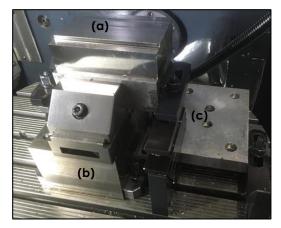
Experimental setup; (a) Workpiece – Inconel 718, (b) Kistler 9443B dynamometer, (c) Fixtures
